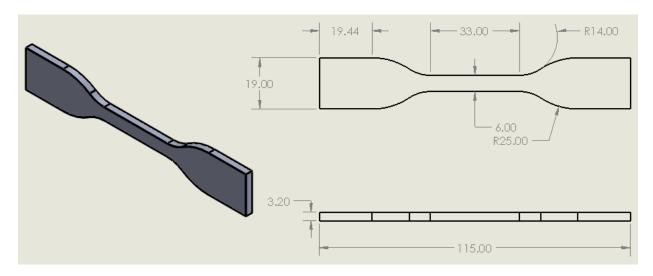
Dogbone Type IV specimen dimensions in millimeters.
